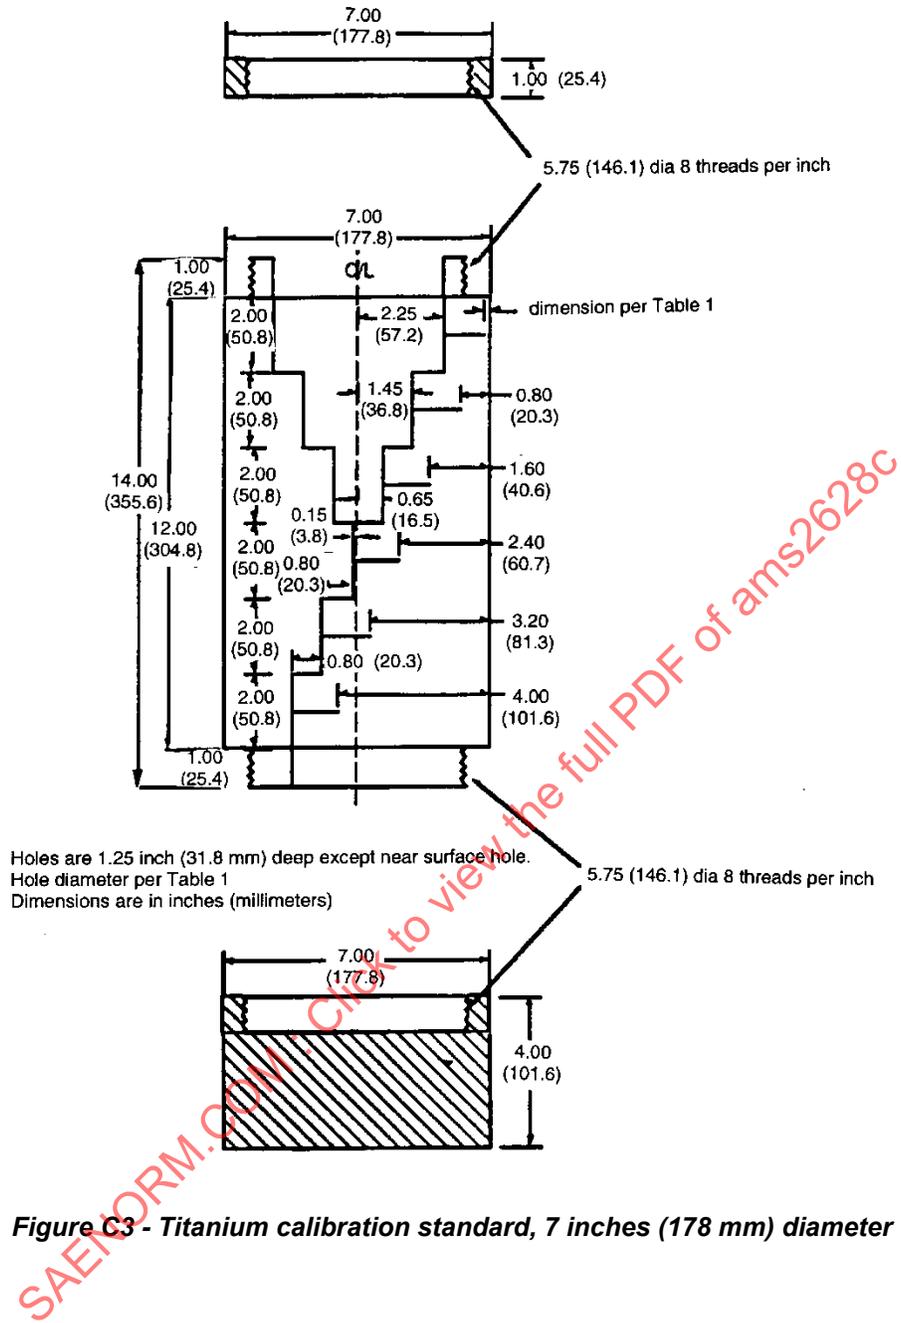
Titanium calibration standard, 7 inches (178 mm) diameter
